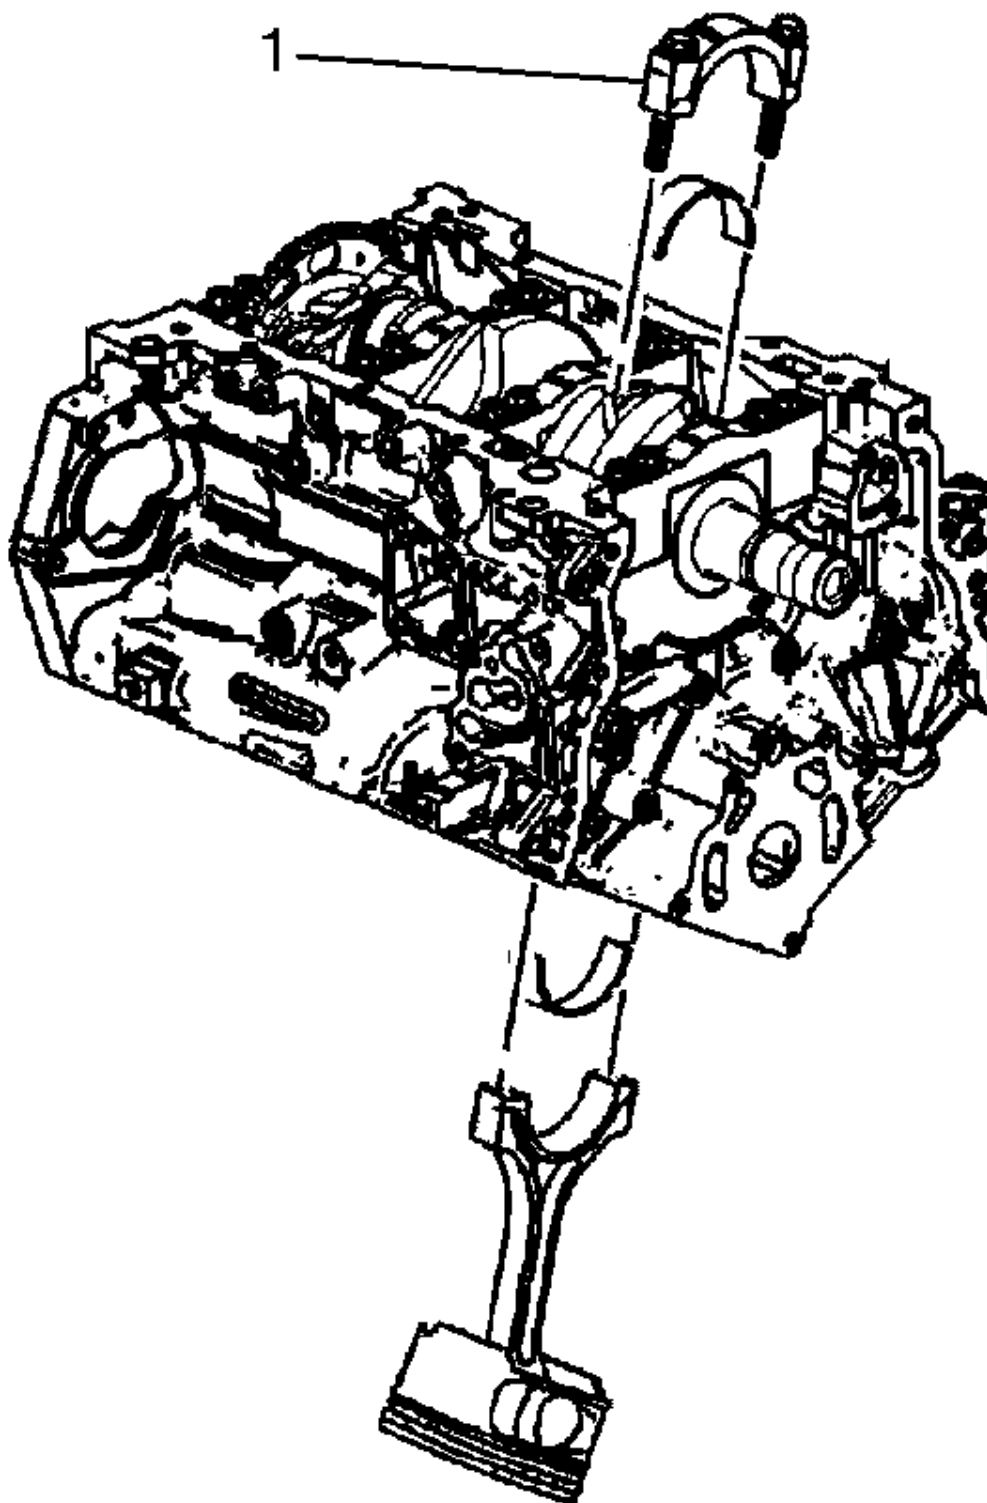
View Of Crankshaft Bearing Clearance
